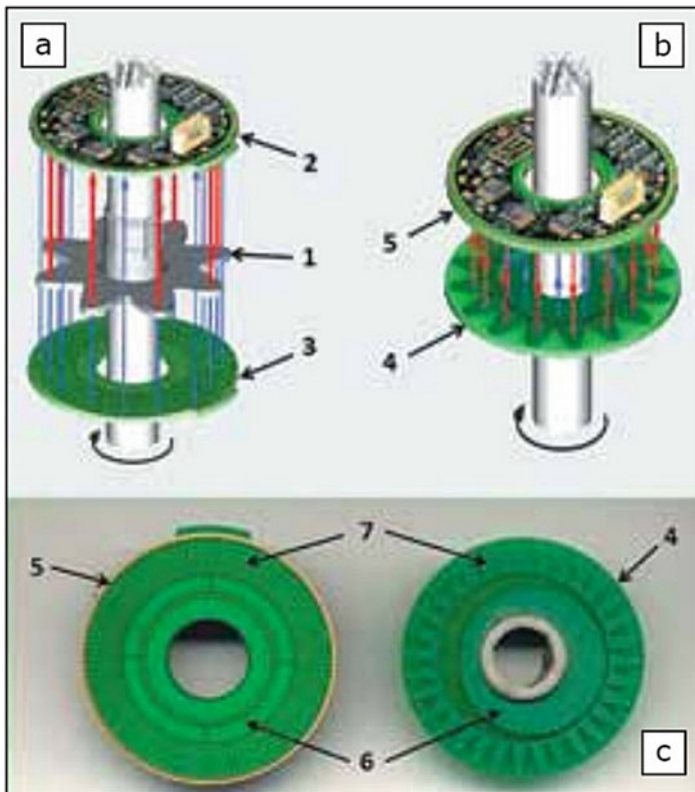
Netzer angular sensor design options: (a) with dielectric rotor; (b, c) with rotor combined with bottom board: 1. dielectric rotor; 2. top plate with electronics; 3. bottom plate; 4. rotor combined with bottom plate; 5. top plate with electronics; 6, 7. electrodes of coarse and fine channels respectively
